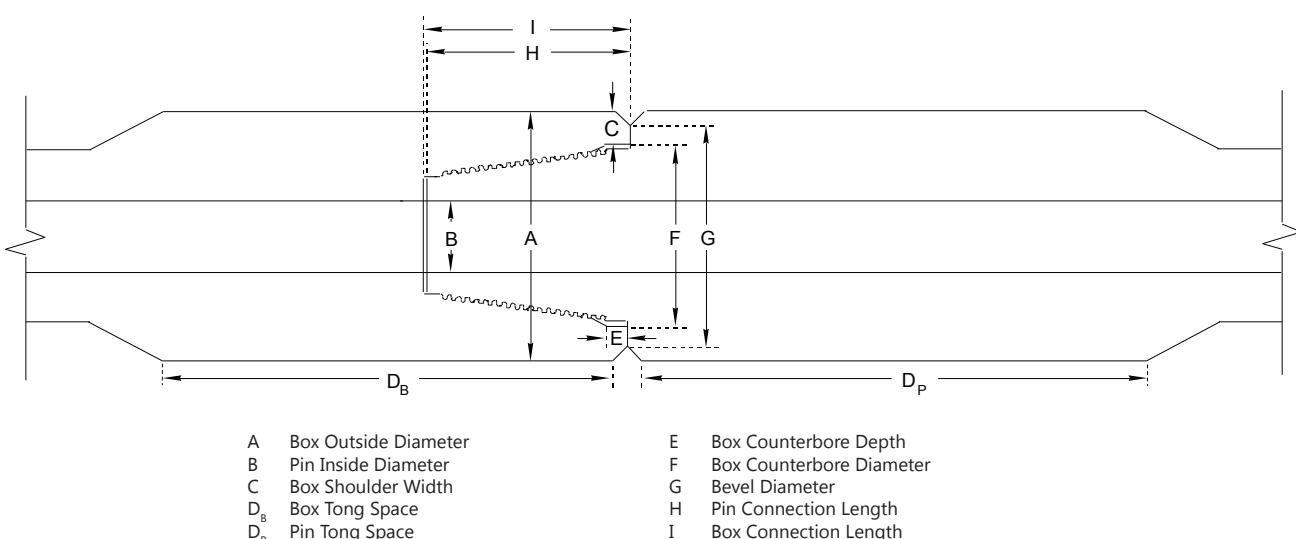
Tool joint dimensions for NK DSTJ™ connection.
